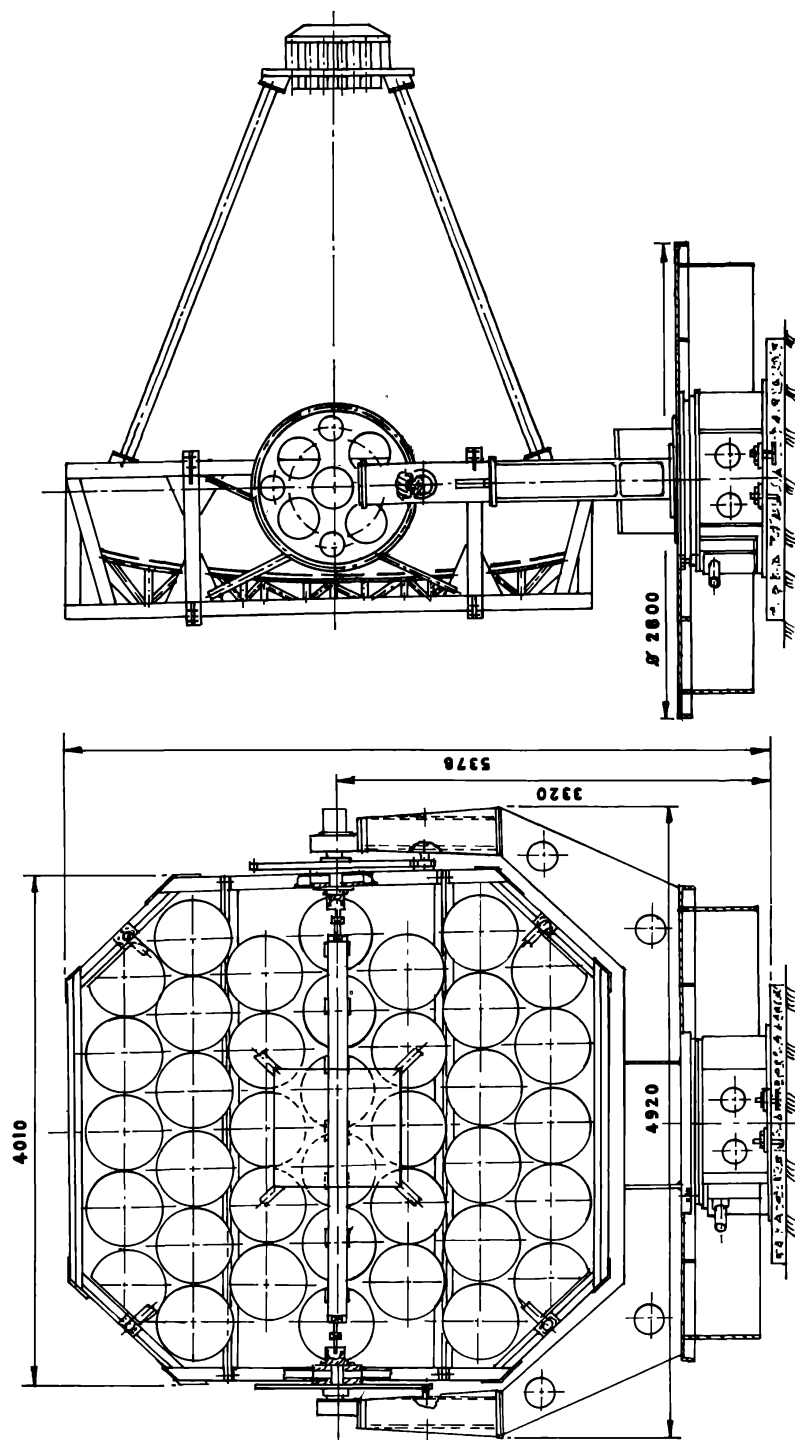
The front and the side elevation view of the TACTIC Imaging Unit.
